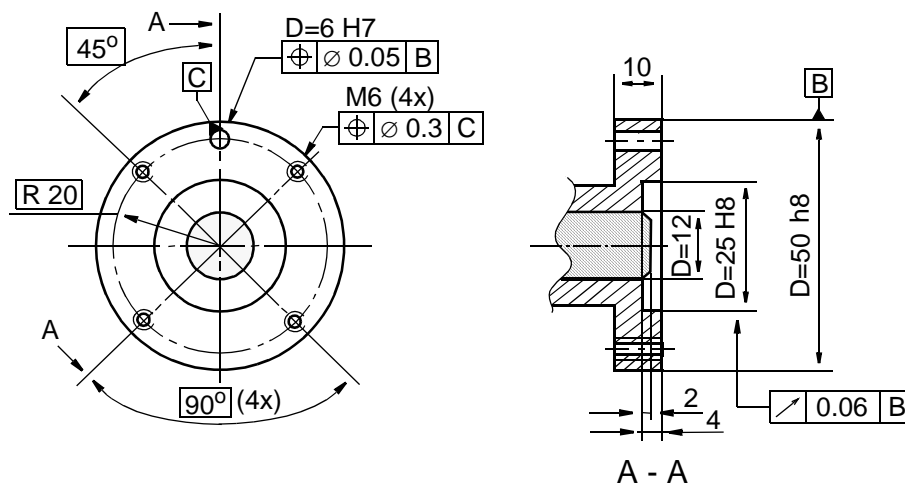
The mechanical interface, mounting flange (dimensions in mm).
